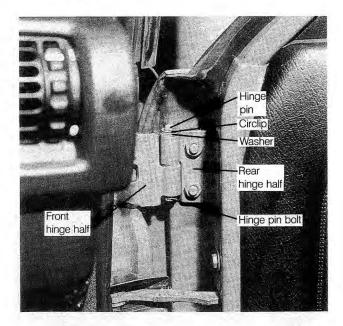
Top hinge on front door, showing mounting hardware. Bottom hinge is similar, except mounting bolt installs from top.
